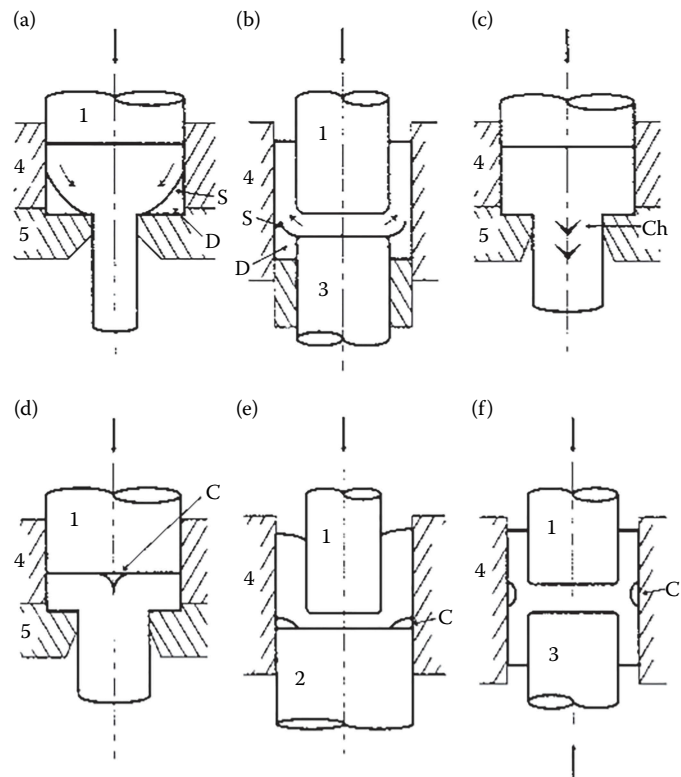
Forging defects, 1. Punch, 2. Backup punch, 3. Counter punch, 4. Container, 5. Die, D. Dead metal, S. Skin, C. Contraction. (a) Dead metal; (b) Skin inclusion; (c) Chevron crack; (d), (e), (f) Contraction
